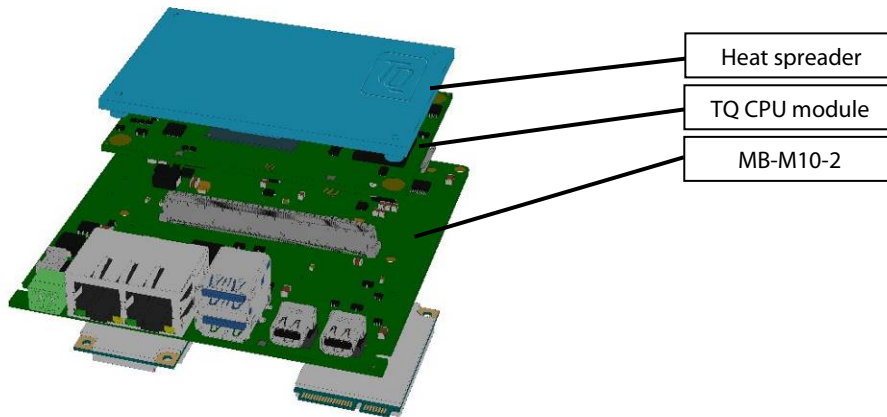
3D view, hardware kit assembly with carrier board MB-M10-2
